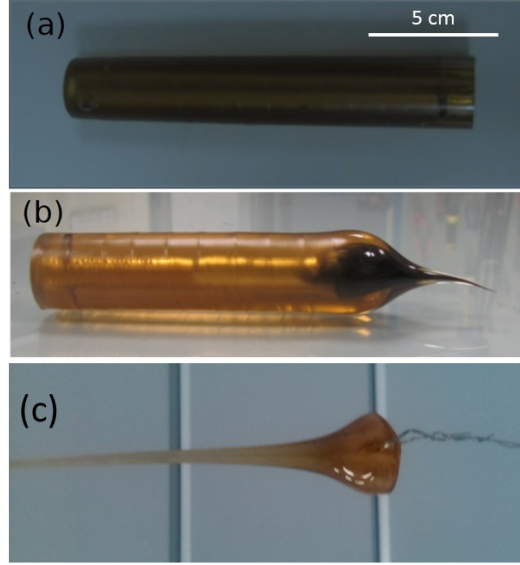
A macroscopic preform (a) before and (b) (c) after fiber drawing. (b) the remaining part after drawing process and (c) is the first coming part in fiber drawing process.
